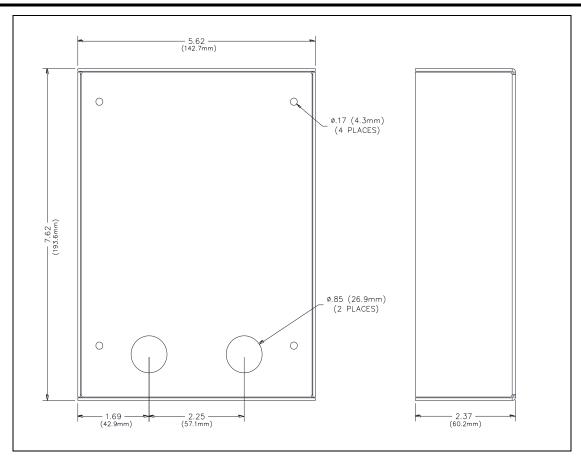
Models 277-712BH/-712BHAC Dust Cover Detail
